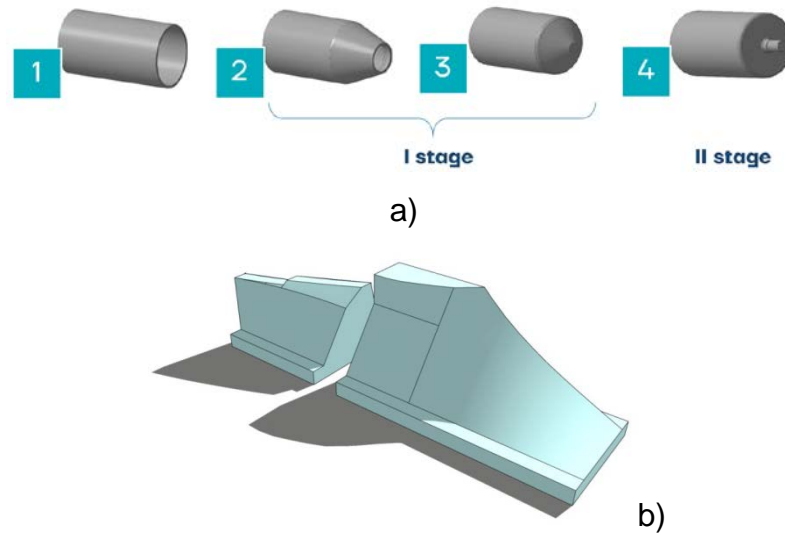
Stages of neck formation (a) and arrangement of two consecutive friction tools (b)
